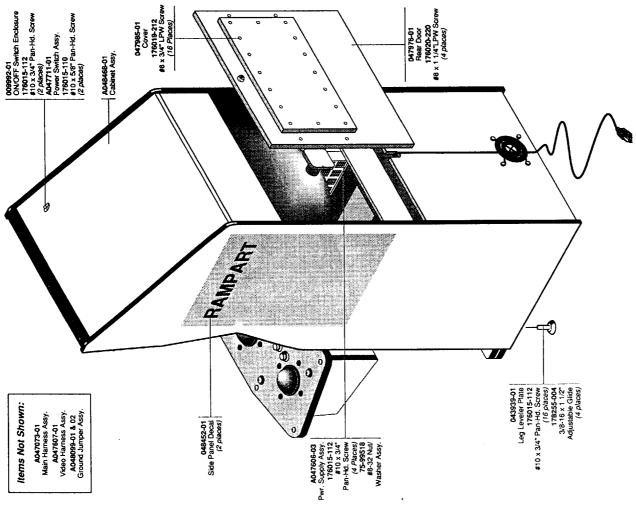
Cabinet-Mounted Assemblies A048470-01 B
